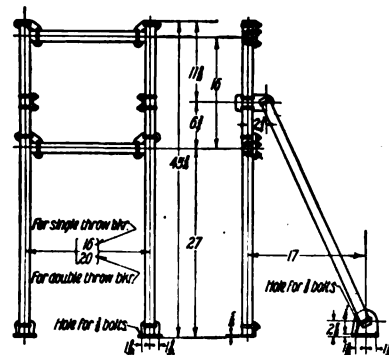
SUPPORTING FRAMEWORK FOR THE TYPES F-11 or F-22 SINGLE-THROW BREAKER UNIT; PANEL-MOUNTING BREAKER; ANY COVERPLATE; OR TYPE F-11 DOUBLE-THROW BREAKER UNIT
